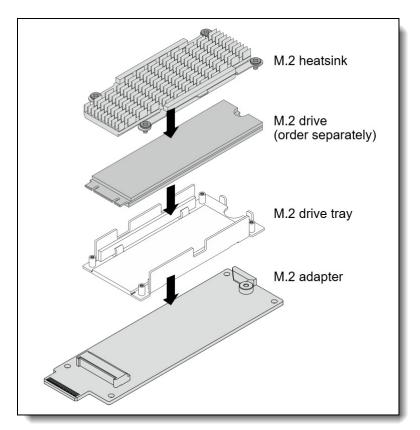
Components of the ThinkSystem V4 1U/2U Hot Swap M.2 SATA/NVMe Drive Assembly Kit
